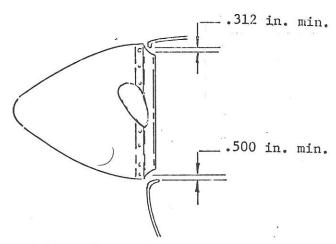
Backplate and Forward Cowl Clearance Dimensions.
